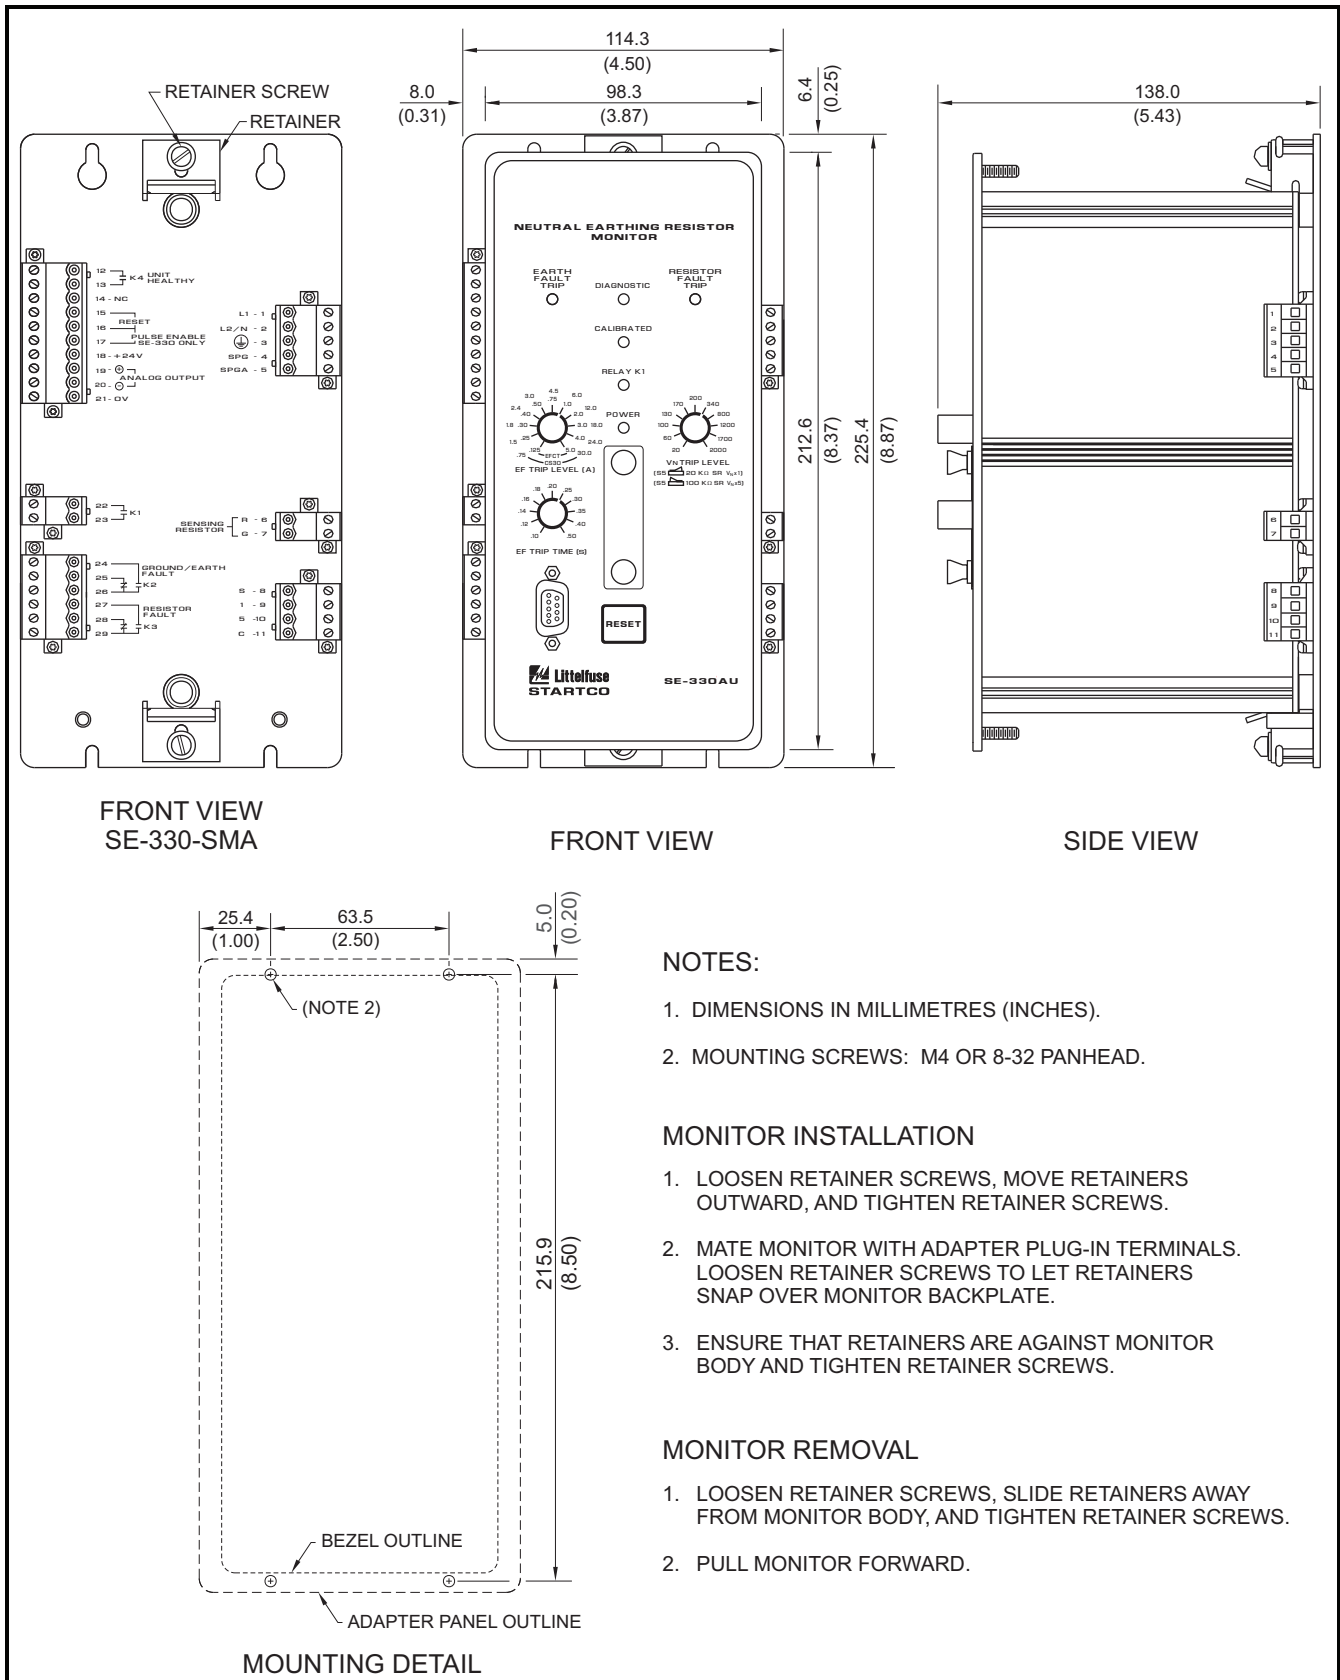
SE-330AU Outline and Surface-Mounting Details.
